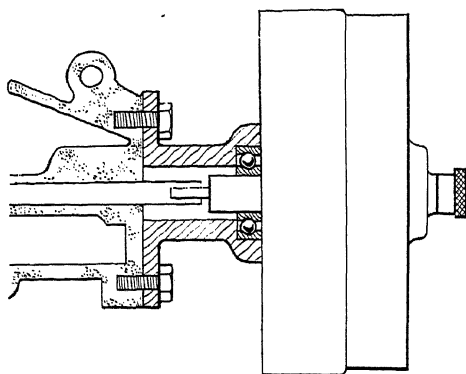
A.C. GENERATOR COUPLED TO EXISTING SPEEDOMETER DRIVE IN GEARBOX
